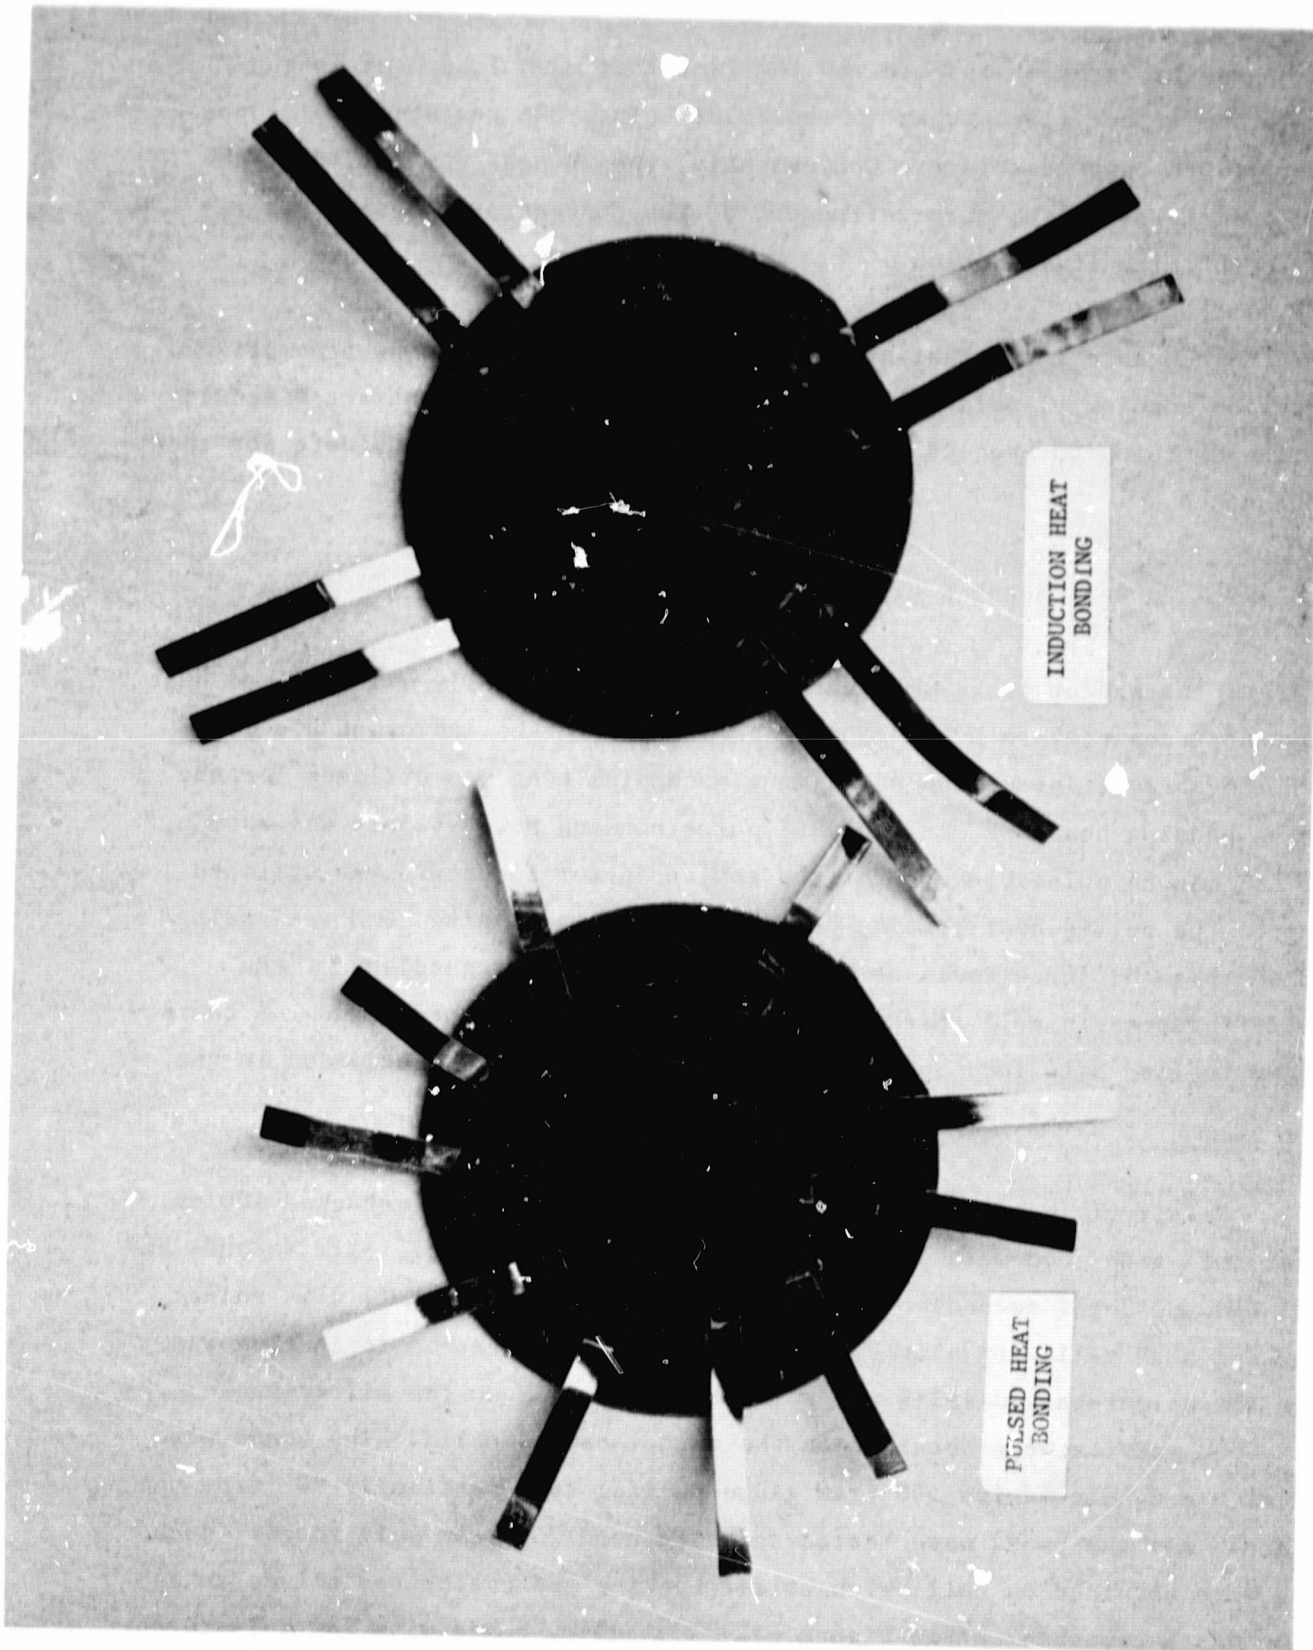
SOLDER BACKED CELL (3 INCH DIAMETER) BONDED BY INDUCTION HEAT AND PULSED HEAT TECHNIQUE
